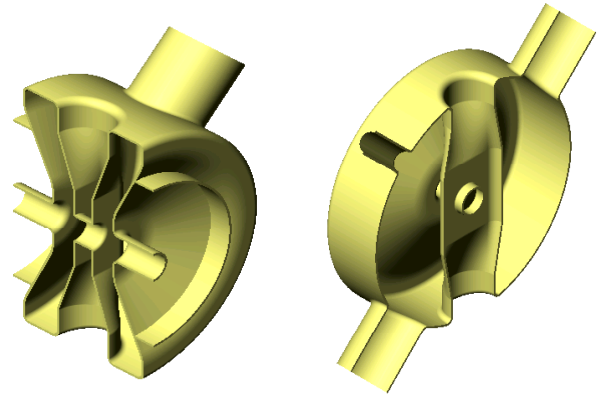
This is a cut-away view of the final cavity geometry with optimized spoke shape, all attached ports and the selected end-wall geometry.
